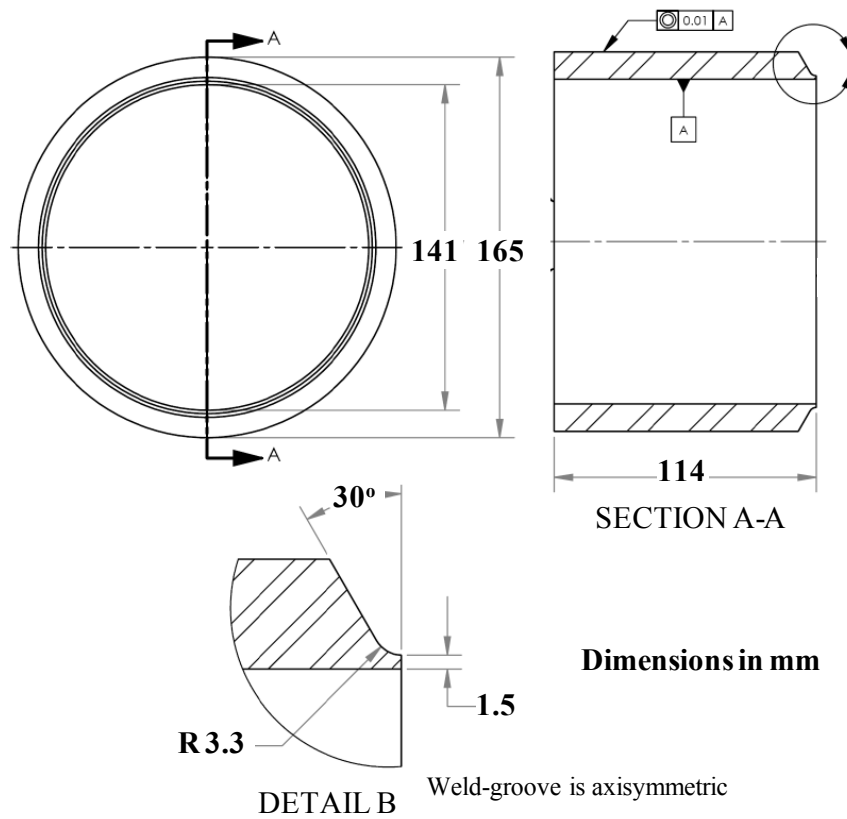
Cylindrical Specimen Geometry (Courtesy: EPRI)
